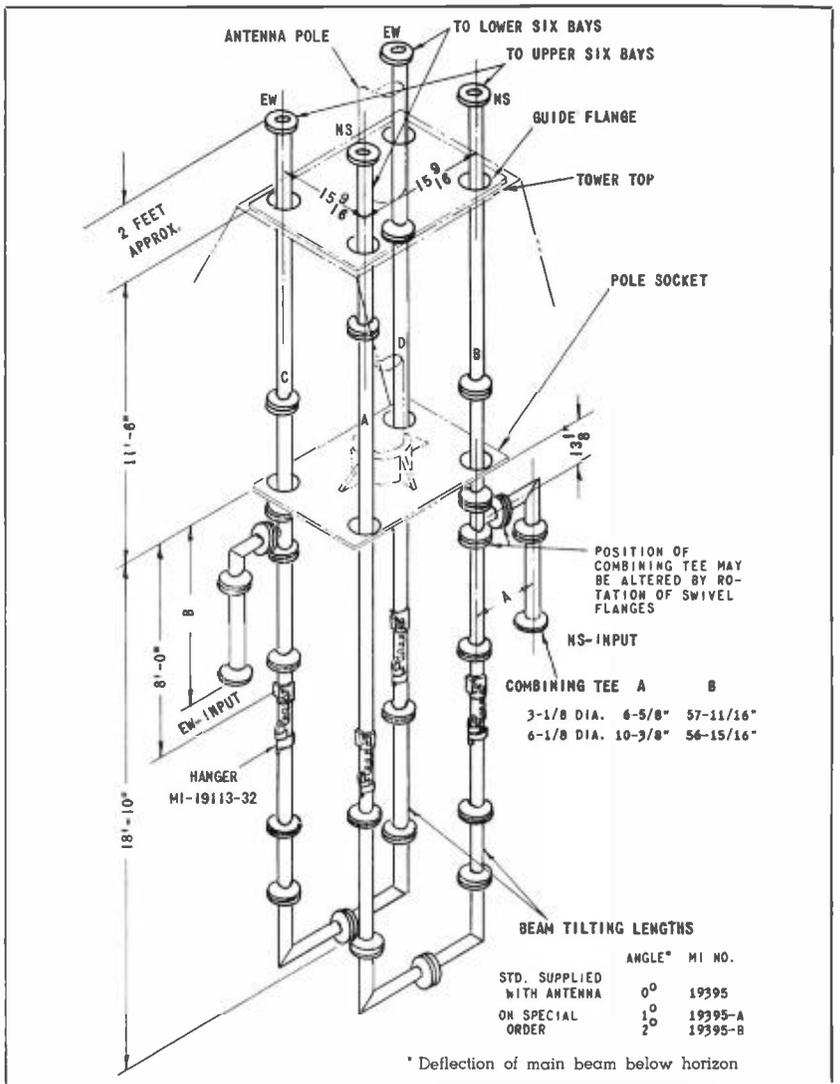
(below). Combining network (Type "A"), TF-12AH Tower Mounting 3/8" Feed Line and TF-12AH-D Tower Mounting 5/8" Feed Line.
